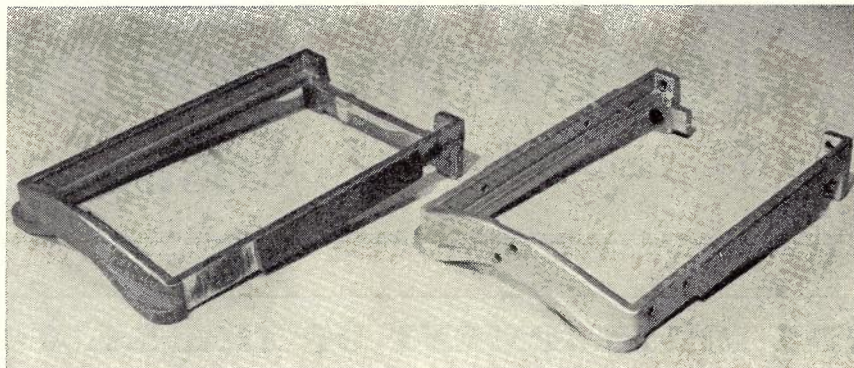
Frame Column. (a) Pressure Die Casting, (b) Machined and finished.
